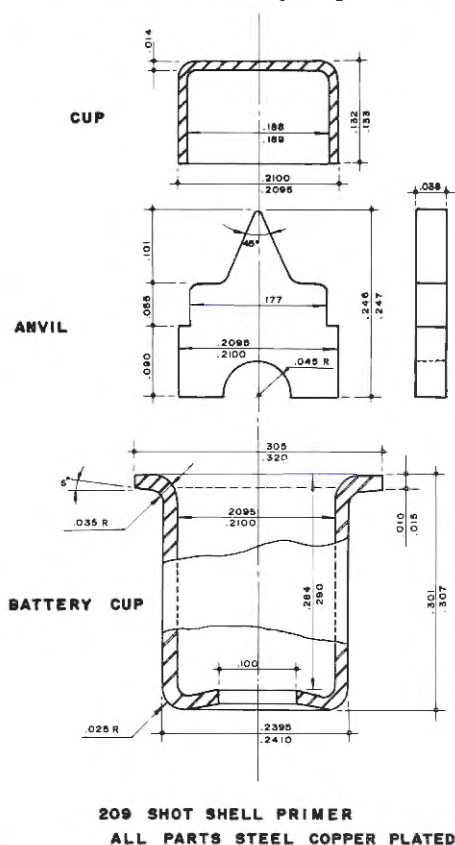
Components and Dimensions for 209-Size Shotshell Primer
